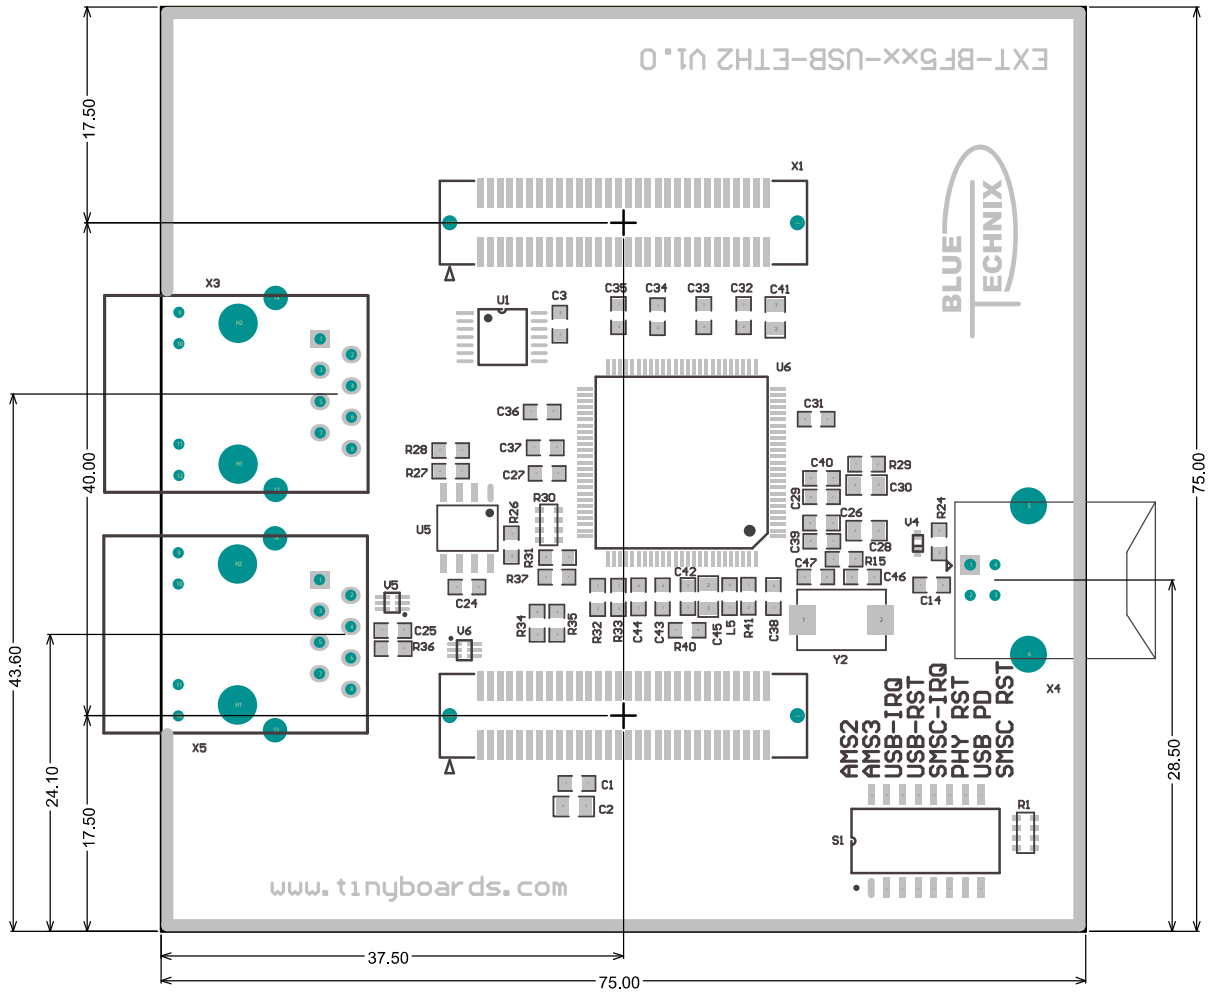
Mechanical Outline – Expansion Connector Placement
